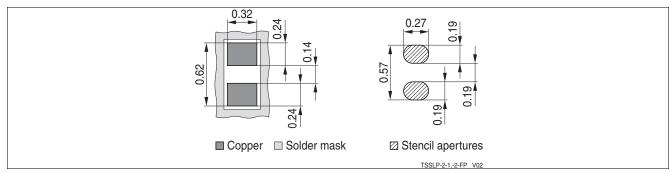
TSSLP-2-3 Footprint (dimension in mm)
